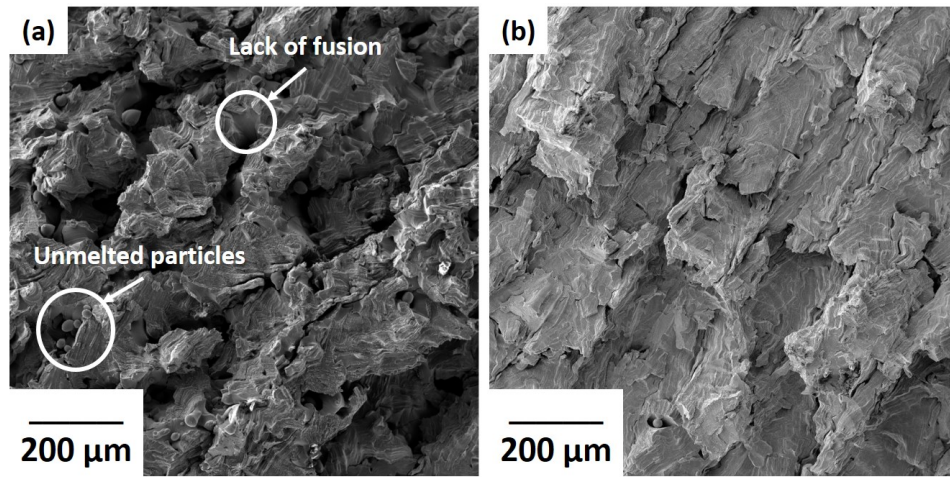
SEM images of fracture surfaces for (a) pure molybdenum and (b) Mo-0.1SiC printed at 400 mm/s.
